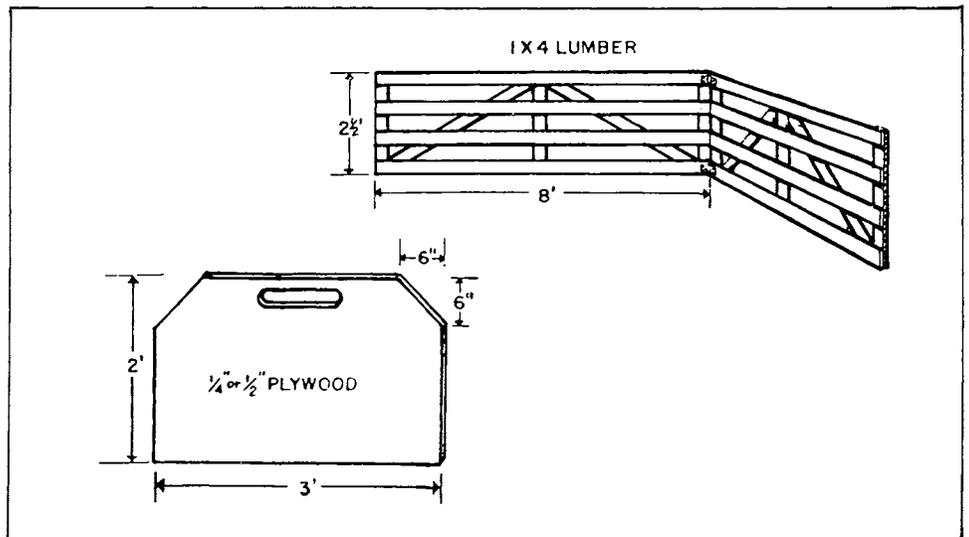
Hand hurdle used to keep a boar from other boars in the show ring.
